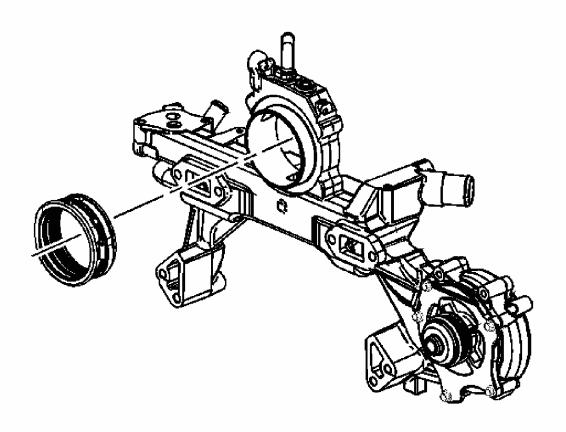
Identifying Throttle Body Plenum Duct Courtesy of GENERAL MOTORS CORP.
